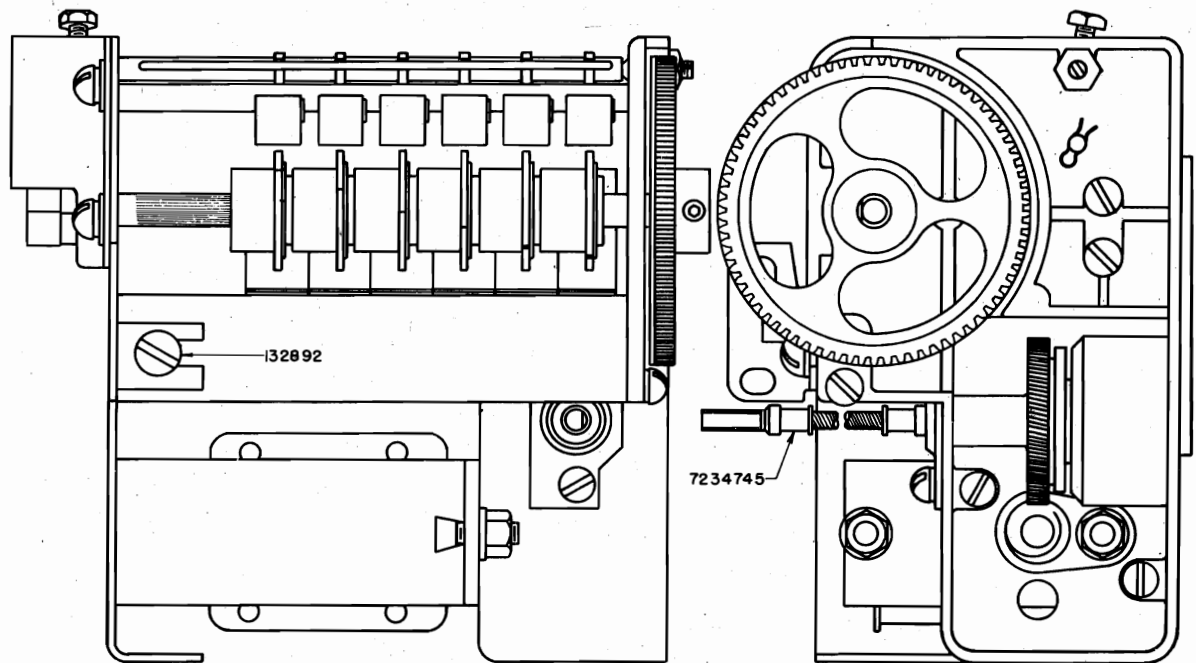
PARTS LAYOUT--DELCO-MATIC TUNER
